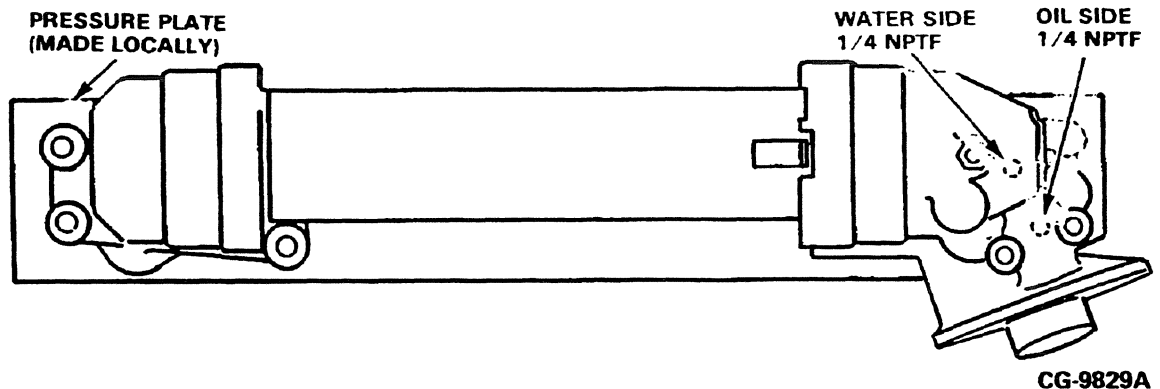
Pressure Plate Assembled to Cooler Assembly
